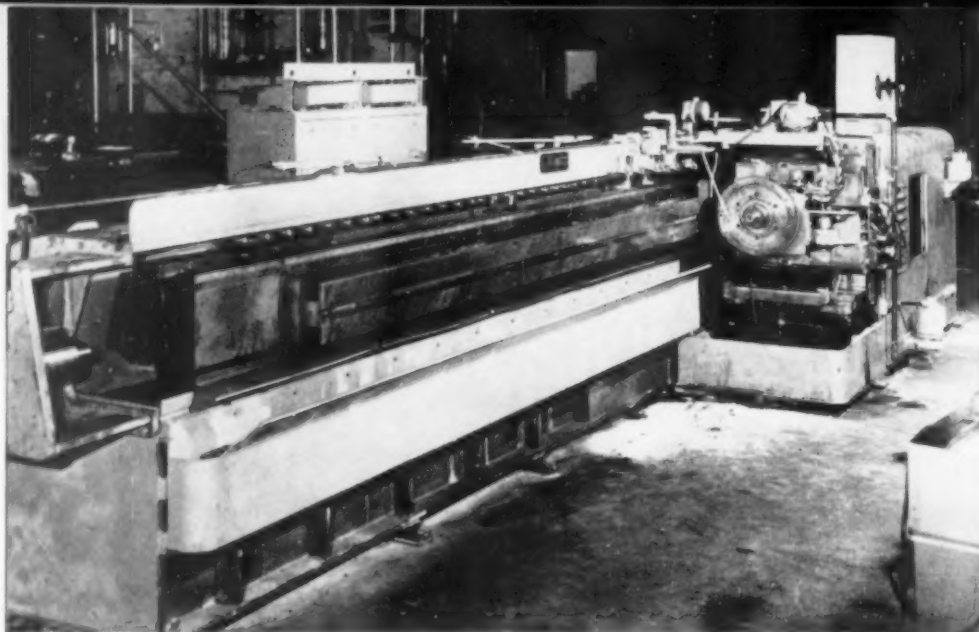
Horizontal electric-drive broaching machine designed to cut pine-tree form on turbine blades.
